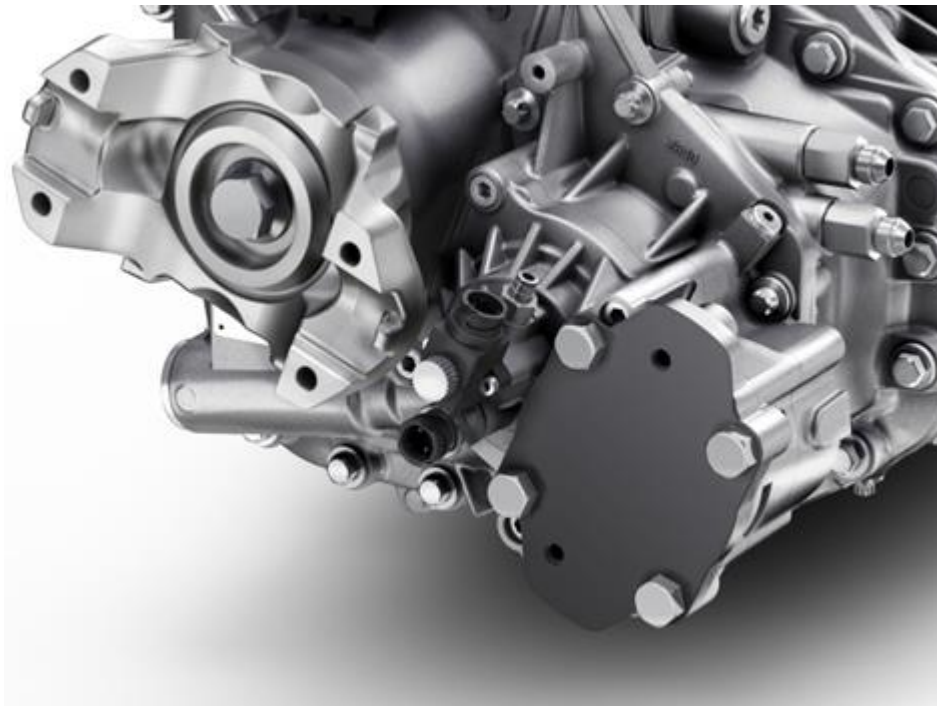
Rear DT12 PTO drive assembly with cover plate.
